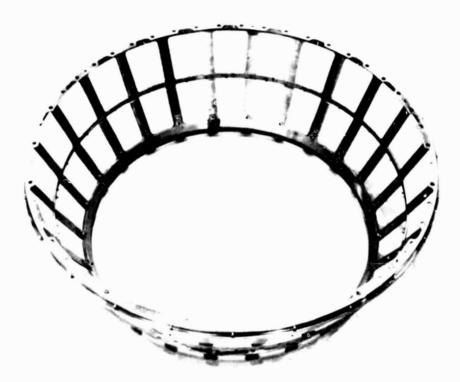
Combustor Component Inner Combustor Advanced Liner Support Frame
